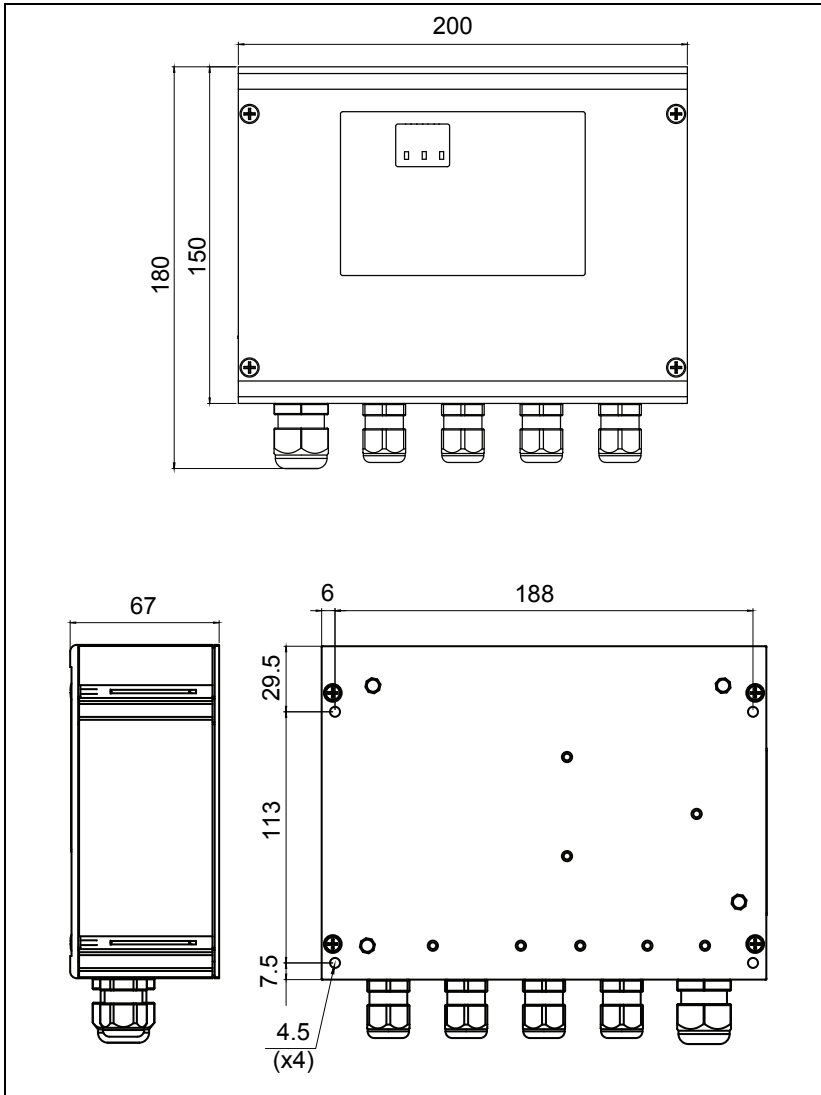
Dimensions, EMX-B25 control unit (mm).
